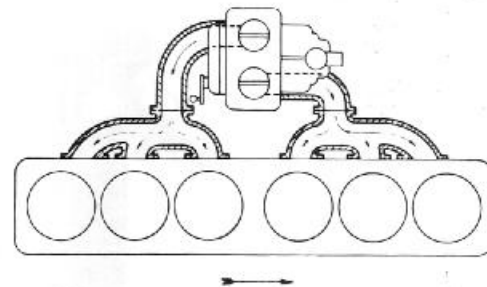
Single carburettor fitted to a six-cylinder in-line engine (Sec 1)
